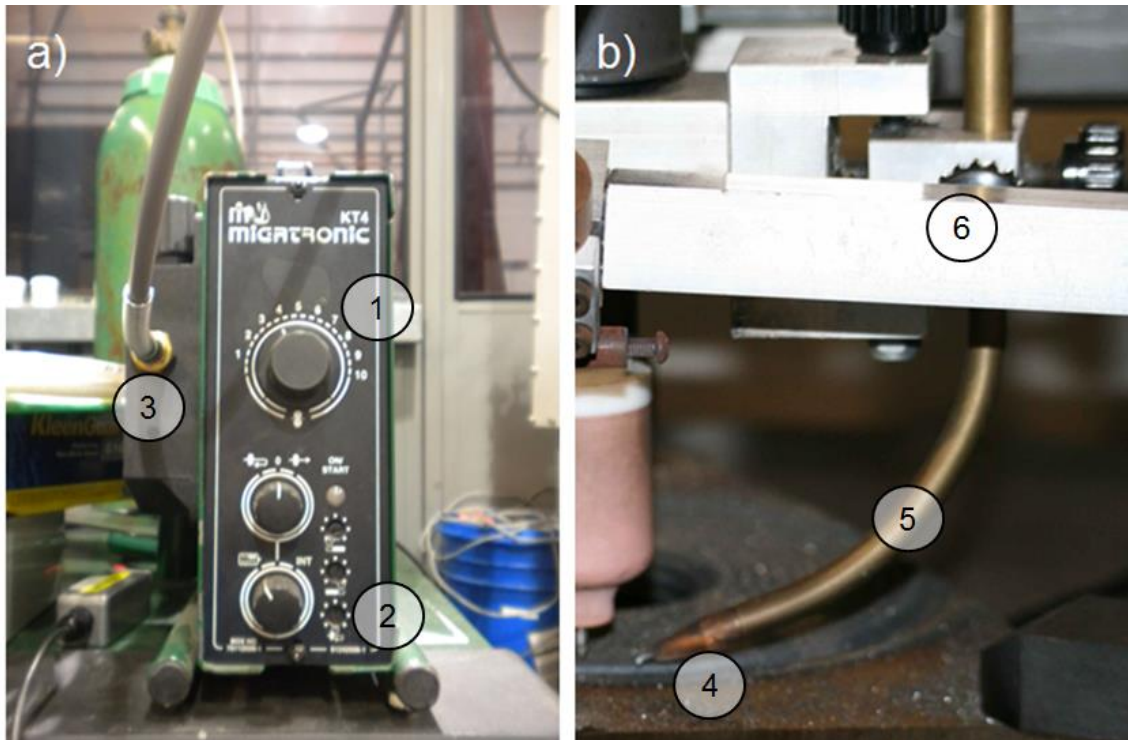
a) migatronik KT-4 wire feeder, 1: Wire feed speed regulator, 2: run-in and run-out function panel, 3: wire guidance hose; b) wire feeder nozzle mounted on the welding system, 4: Copper contact tip, 5: brass pipe, 6: three axes fine adjustment
